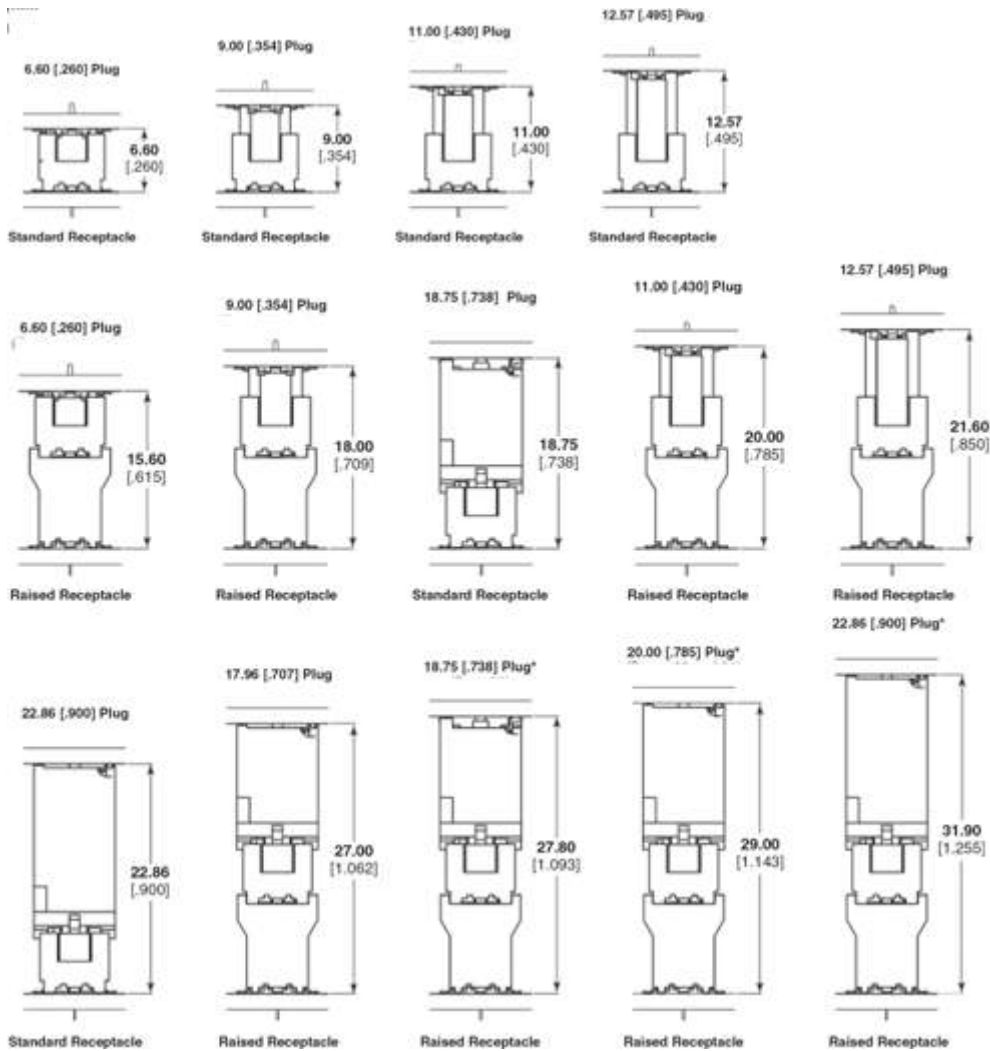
Mictor Connector Plug mechanical outline- bank segment
